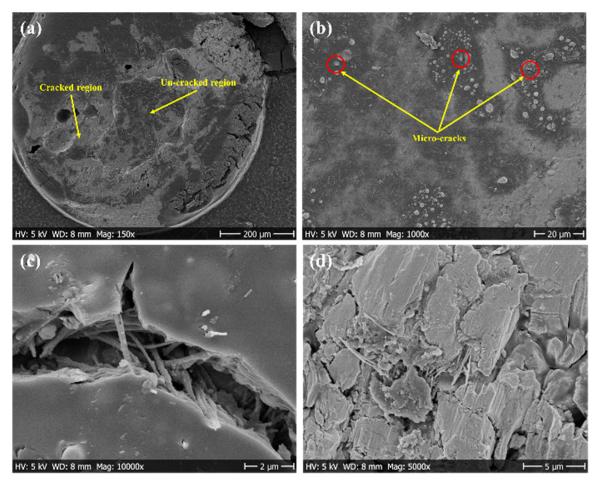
Fracture surface analysis of (a) substrate side for VACNF/SAC305 sample, (b) close-up view of uncracked region, (c) close-up view of micro-crack, and (d) close-up view of cracked region.
